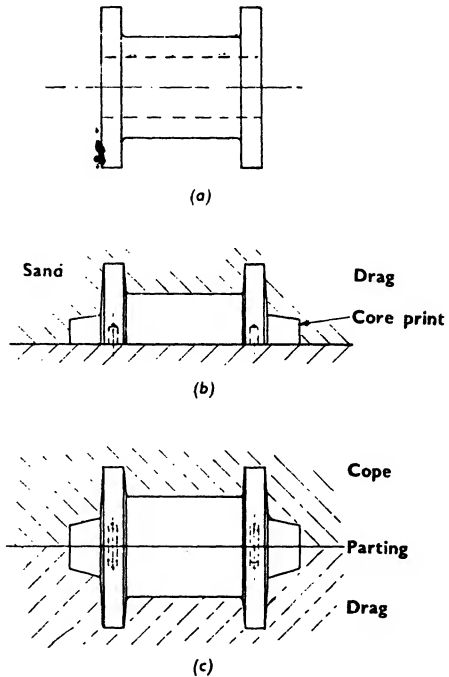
MOULDING WITH A TWO-PIECE PATTERN
